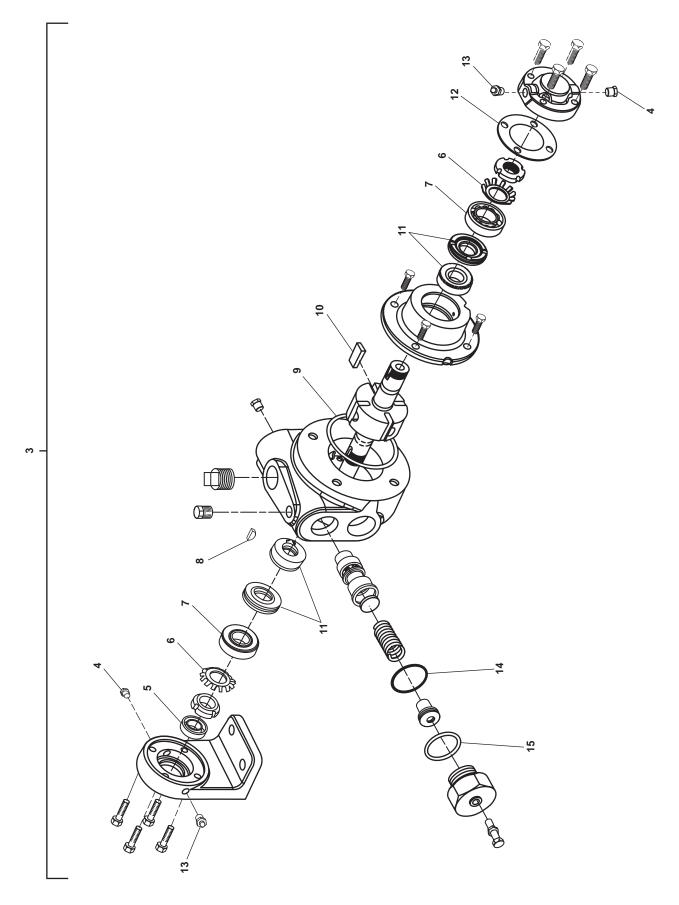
Prelubrication Oil Pump (Sheet 2 of 2)
